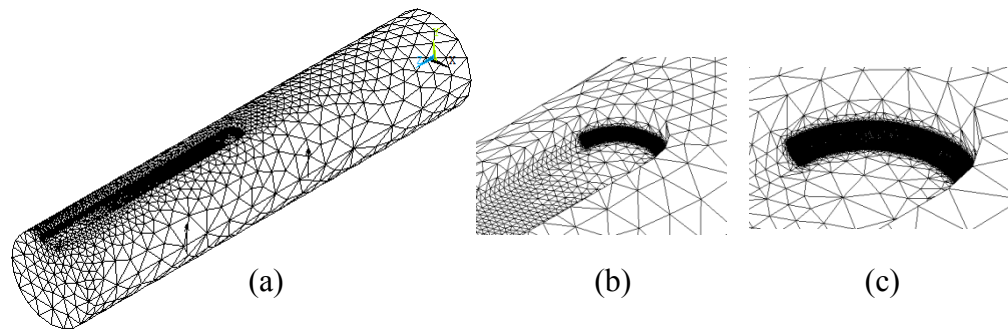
3D shaft FEM models of Fessler and colleagues [3], (a) Shaft, (b) Magnifying view of keyway on the shaft, (c) Magnifying view of keyway fillet
